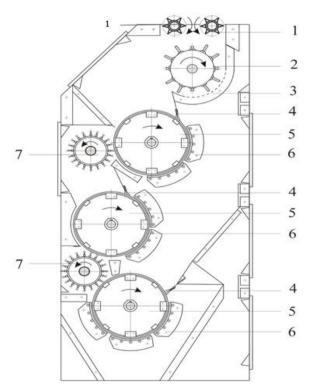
CHX-3M2 large dirt cleaning machine 1- supply rollers; 2- pile drum; 3- mesh surface; 4- compacting brush; 5- saw drum; 6- fence with columns; 7- brush separating drum.
